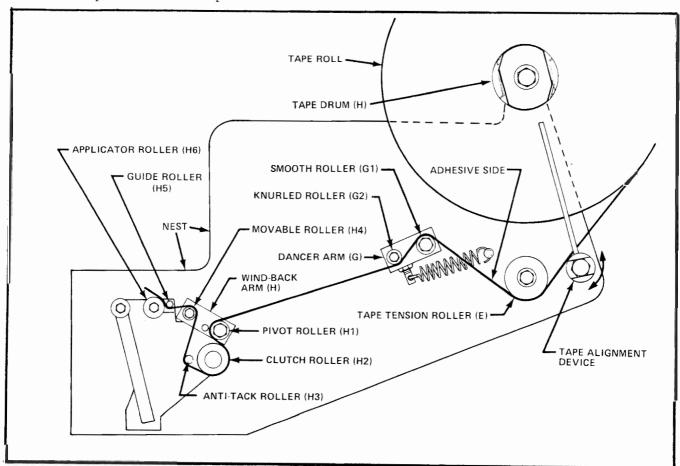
TAPE LOADING & THREADING - RIGHT SIDE VIEW
